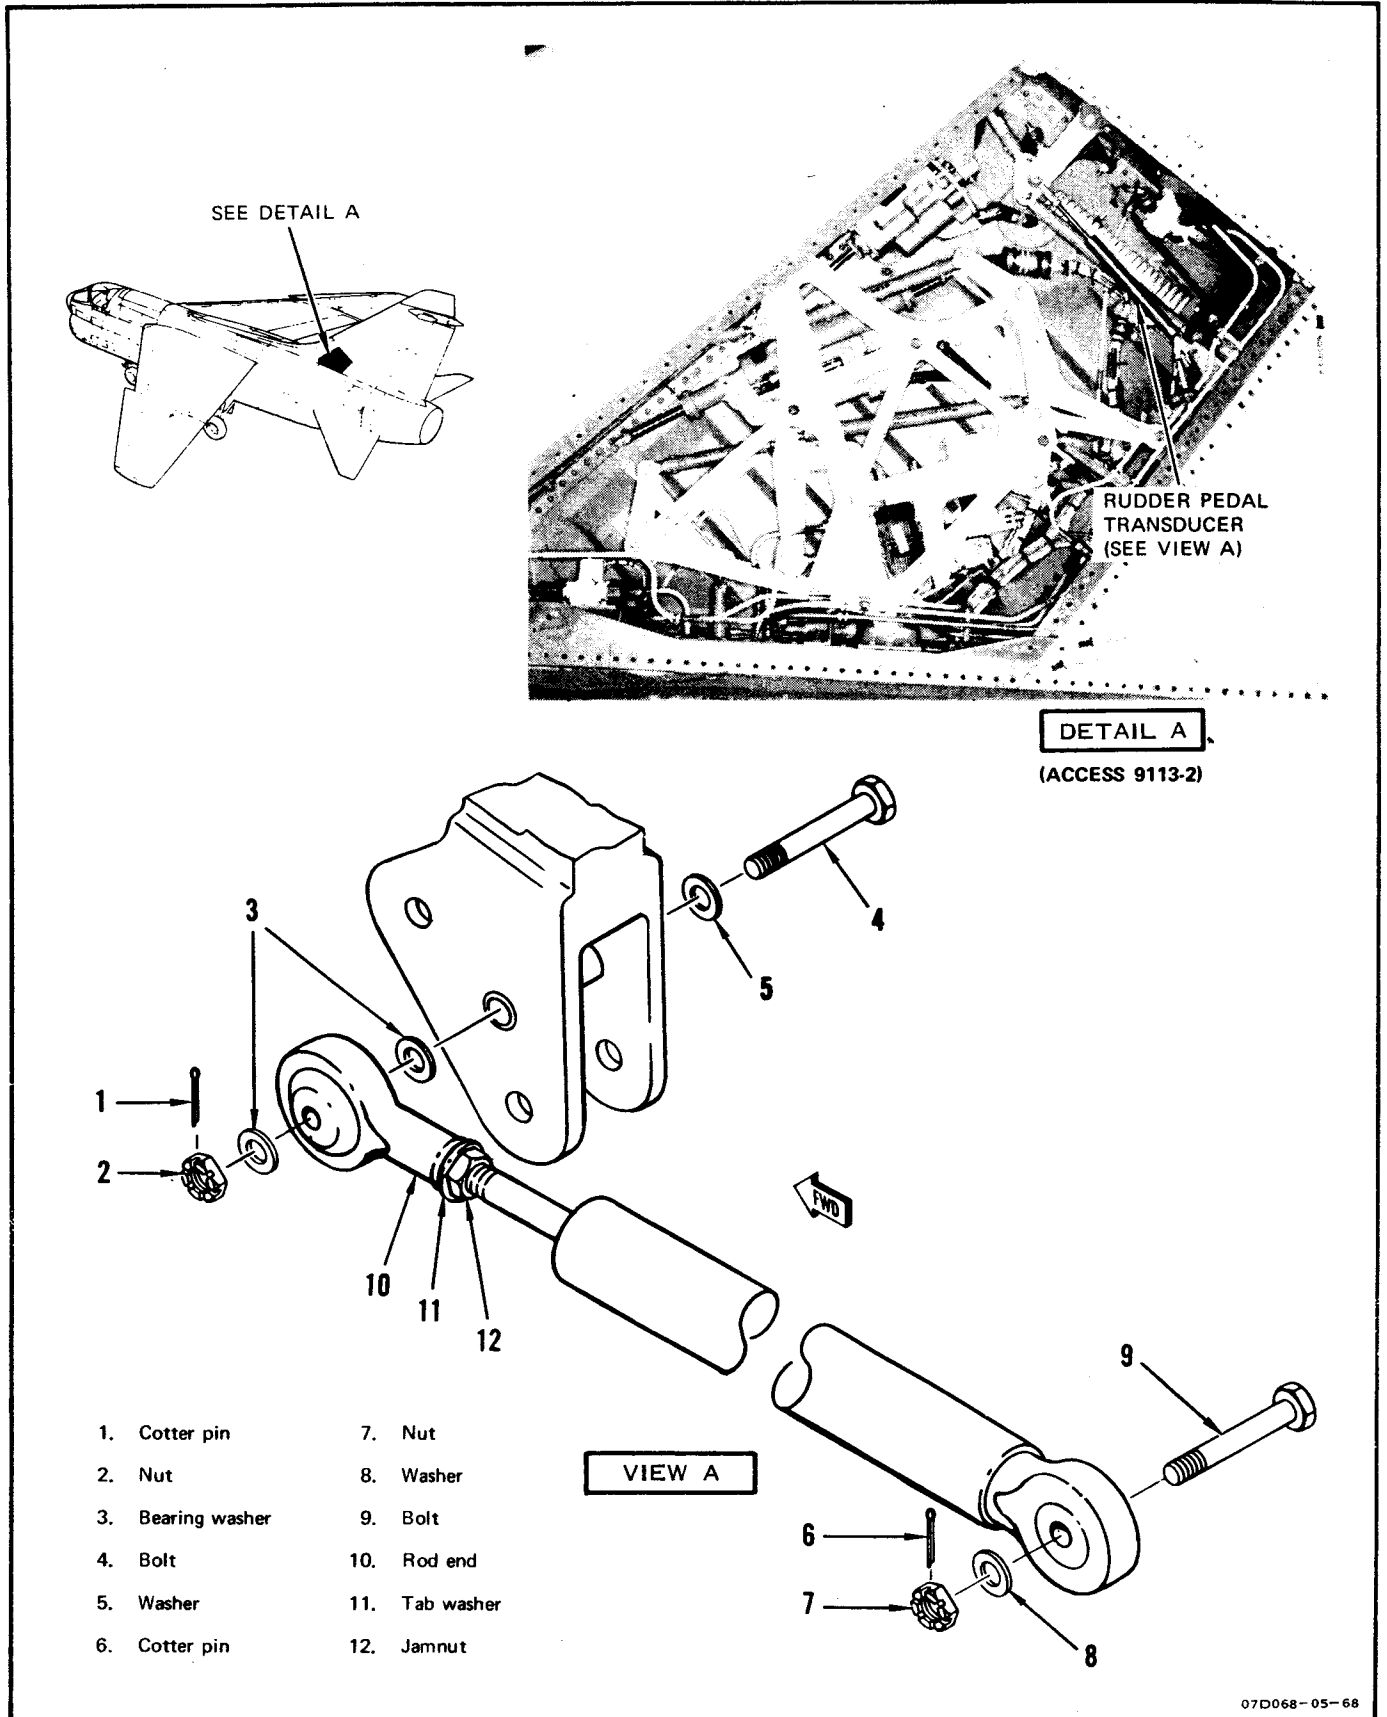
Rudder Pedal Transducer Removal and Installation
